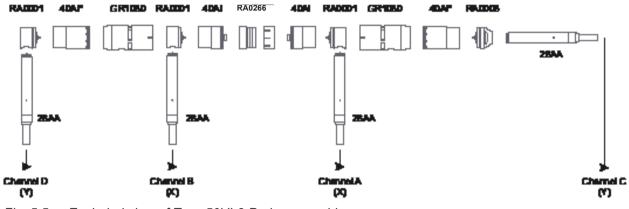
Exploded view of Type 50VI-3 Probe assembly.
